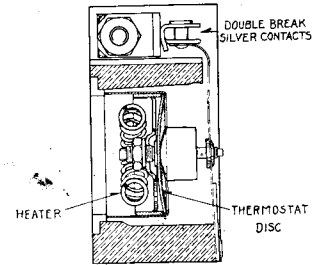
SECTIONAL VIEW TYPE MW OVERLOAD RELAY WITH RESET ROD REMOVED
